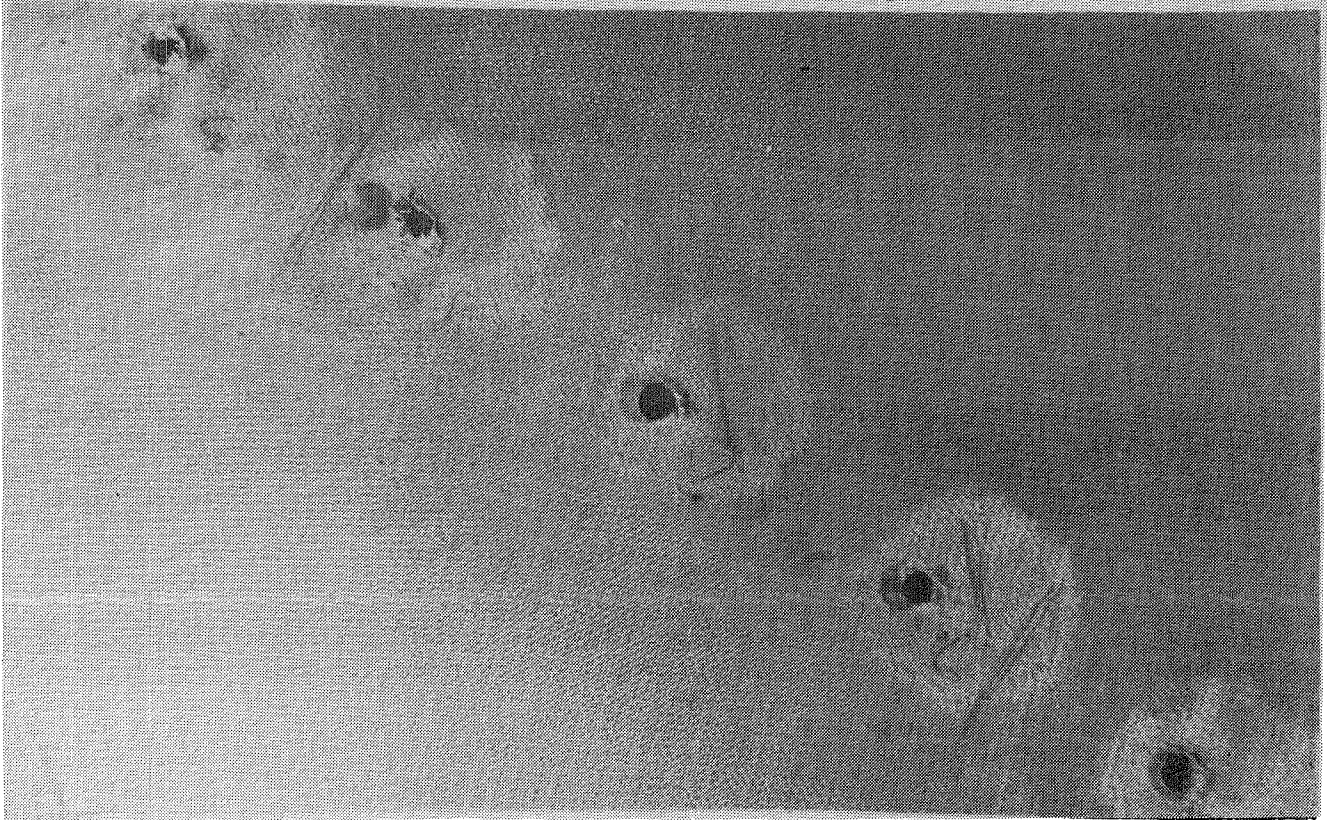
Eastern Left-Hand Aft Engine Fairing - Frayed Fastener Holes Along Intercostal.
